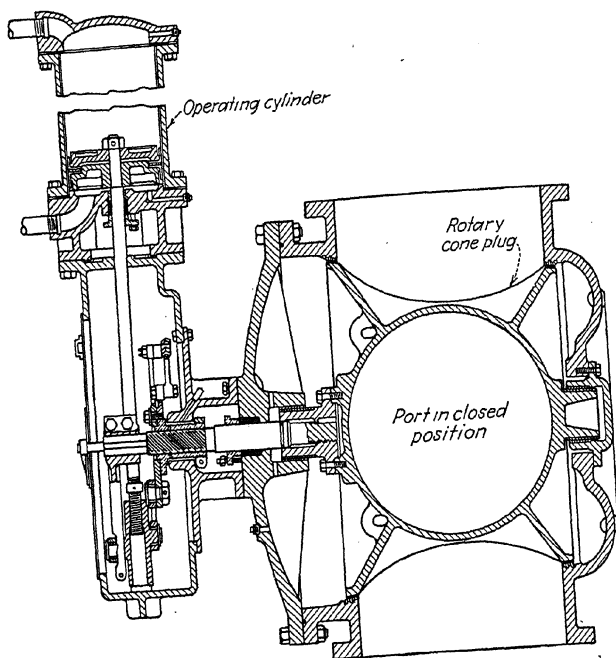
Hydraulically-operated pilot-controlled cone valve for use as a check valve or a relief valve for reducing shock pressure due to water hammer. (Courtesy of the Chapman Valve Manufacturing Company.)
